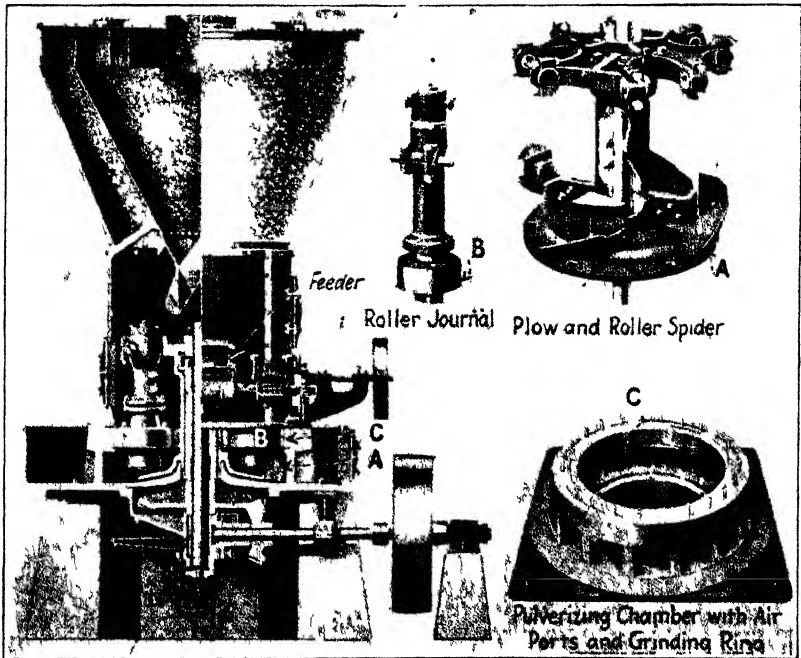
Details of roller mill and air separator. (*Raymond Brothers Impact Pulverizer Company*)
